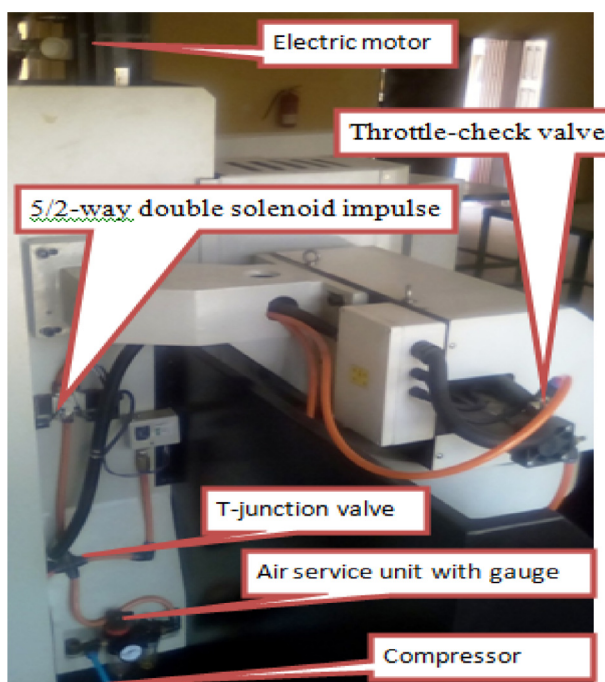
Electro-pneumatic assembly of the CNC milling machine.
